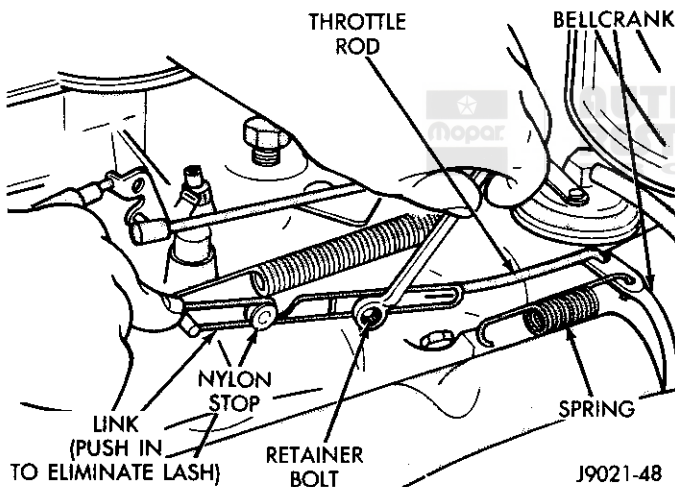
Linkage Adjustment — 8 Cylinder Engine
